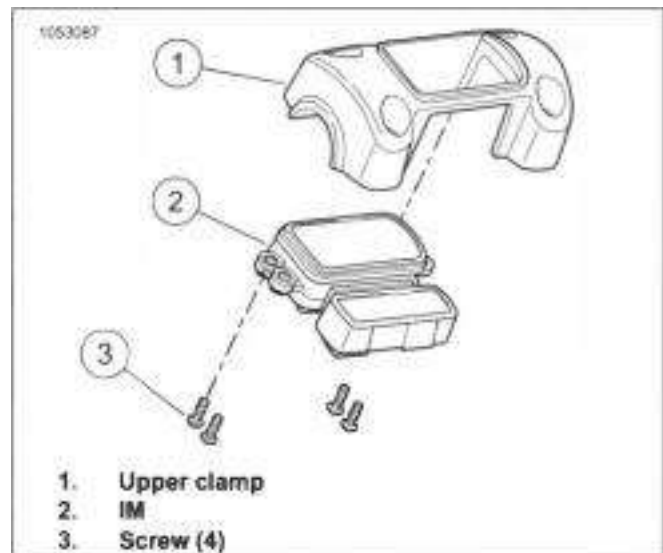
IM: Handlebar Mounted, Rectangular Handlebar
